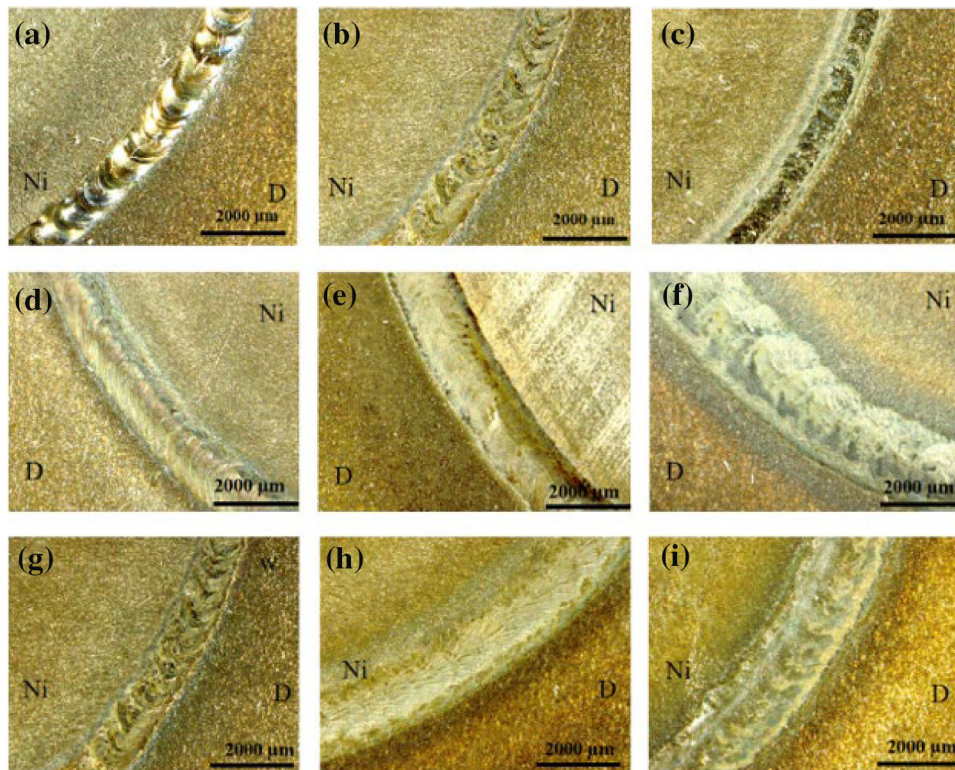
The weld bead appearance (laser power 400 W, welding speed 300 mm/min) at different focal distance of (a) 0 mm, (b) 1.5 mm, (c) 3 mm (focal distance 0 mm, welding speed 300 mm/min) at different laser powers of (d) 300 W, (e) 350 W, and (f) 450 W, (laser power 400 W, focal distance 0 mm) at different welding speeds of (g) 400 mm/min, (h) 300 mm/min, and (i) 200 mm/min.
